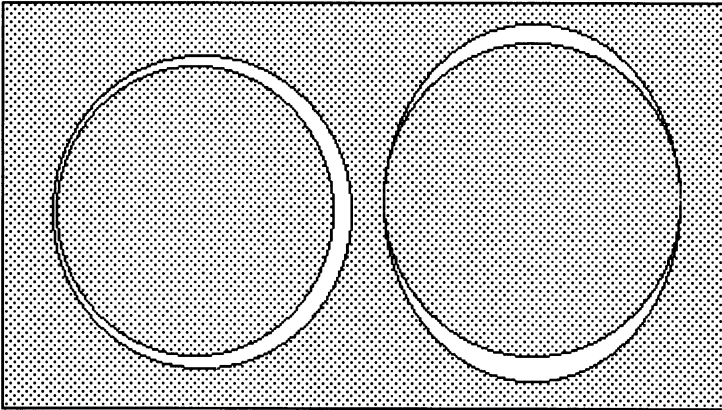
Illustration of eccentric journal placement (left), and second-component, or elliptical, displacement of the bearing surface (right).
